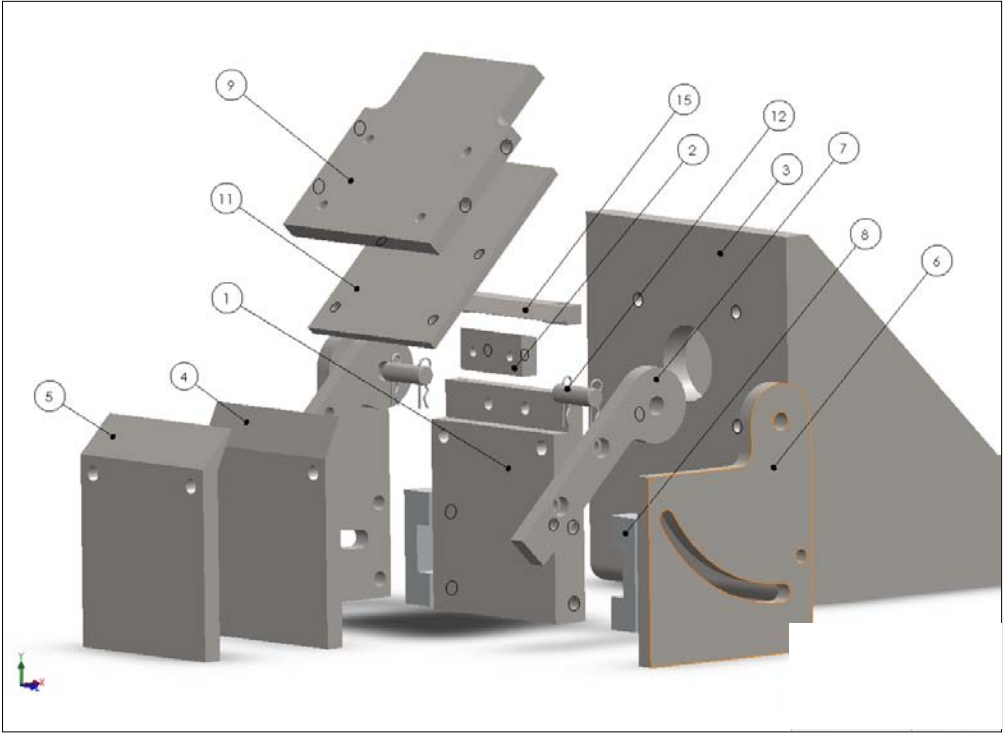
Schematic of die assembly used for sheet metal drawing: exploded view.
